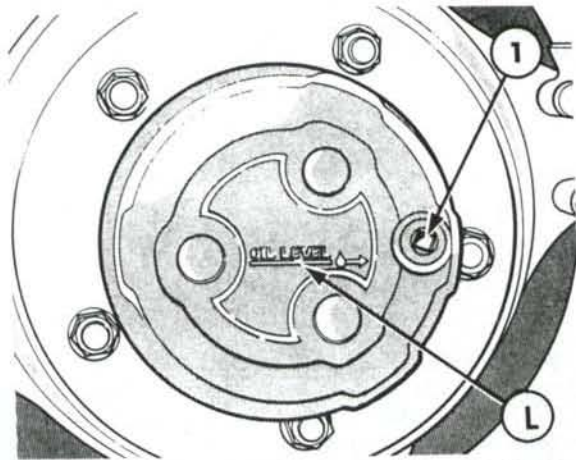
View of "OIL LEVEL" mark (L) and drain plug (1) of front wheel drive front hub.
